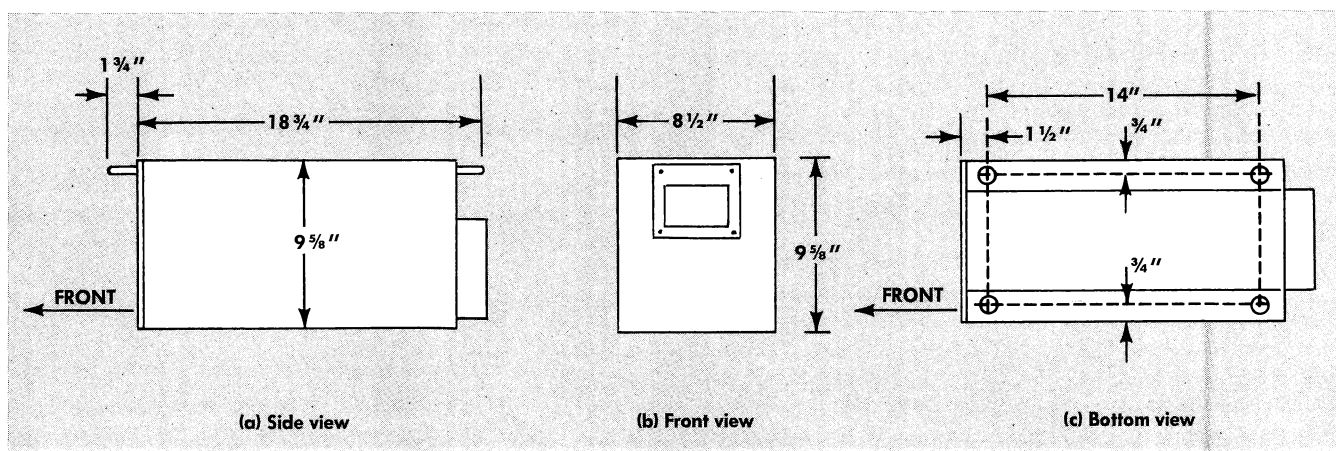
Type 527 (standard version) dimensions and location of mounting holes.
